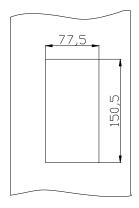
Dimension Size: 150.5 \* 77.5 mm Sheet thickness<1.5mm
